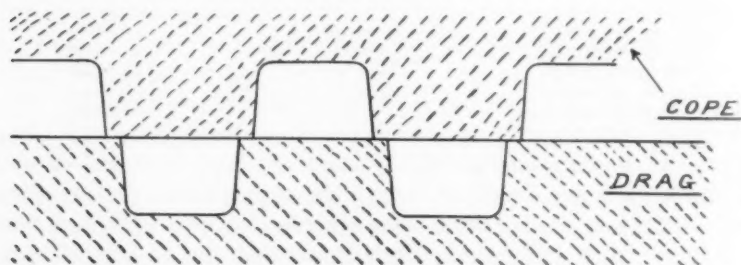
CASTINGS STAGGERED IN DRAG AND COPE
